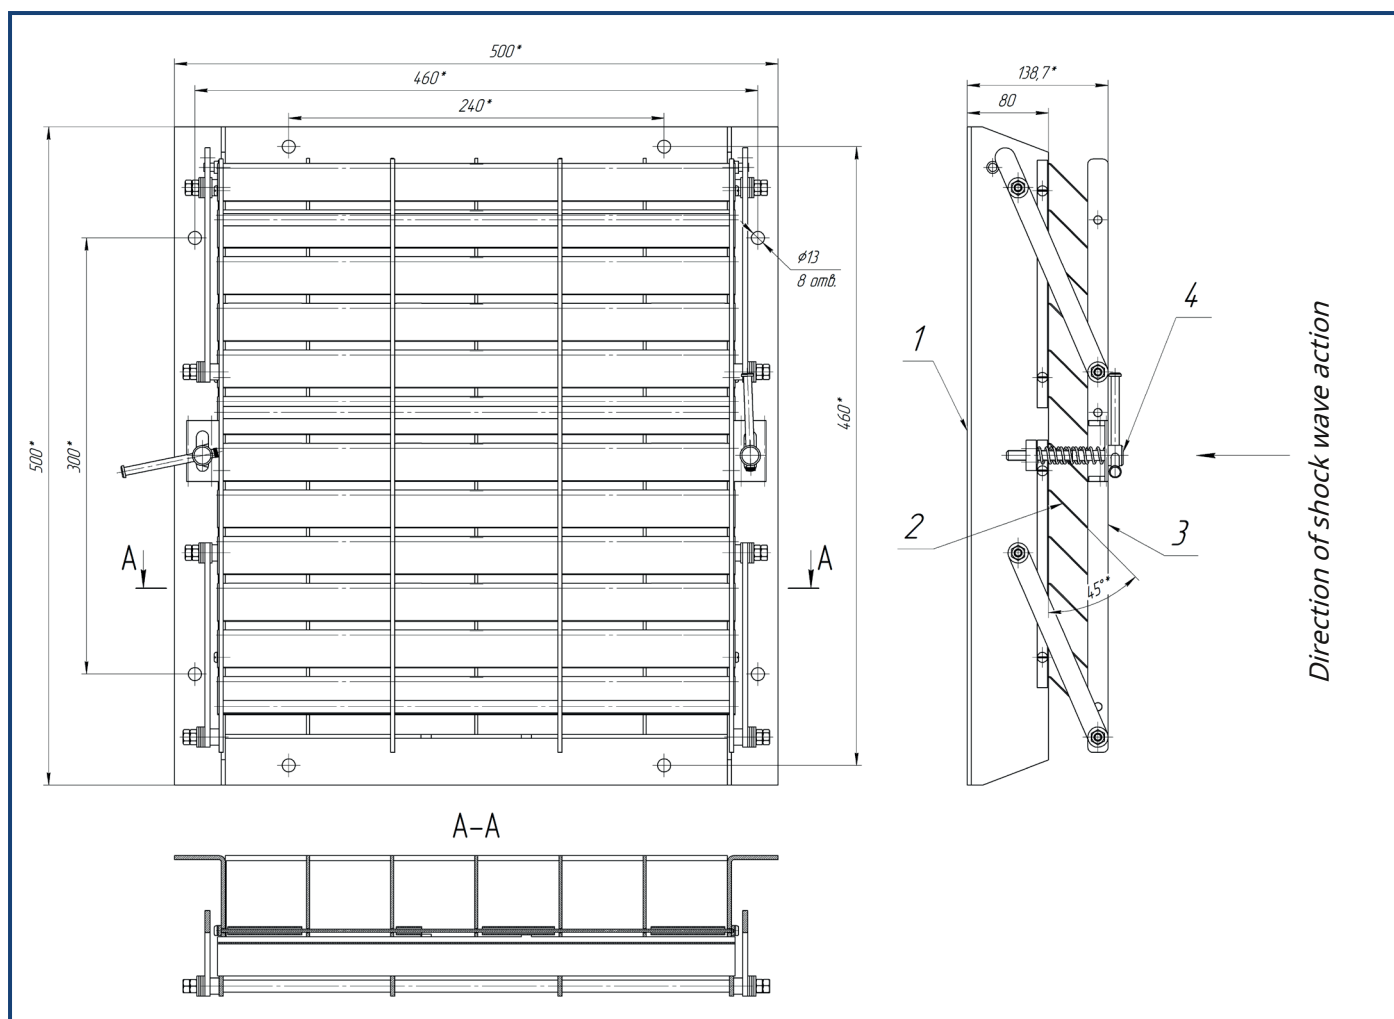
Medium-sized protective section SZS 500x500 1 – Frame; 2 – Louvers; 3 - Movable frame; 4 – Adjusting screw
